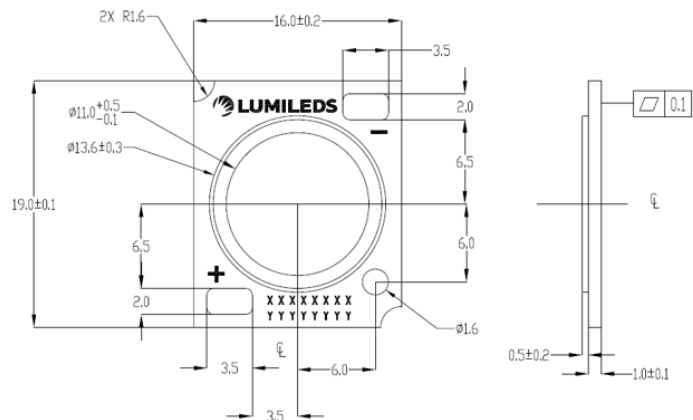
Mechanical dimensions for L2C5-xxxxxL05FHA00 (LES 11 mm)
